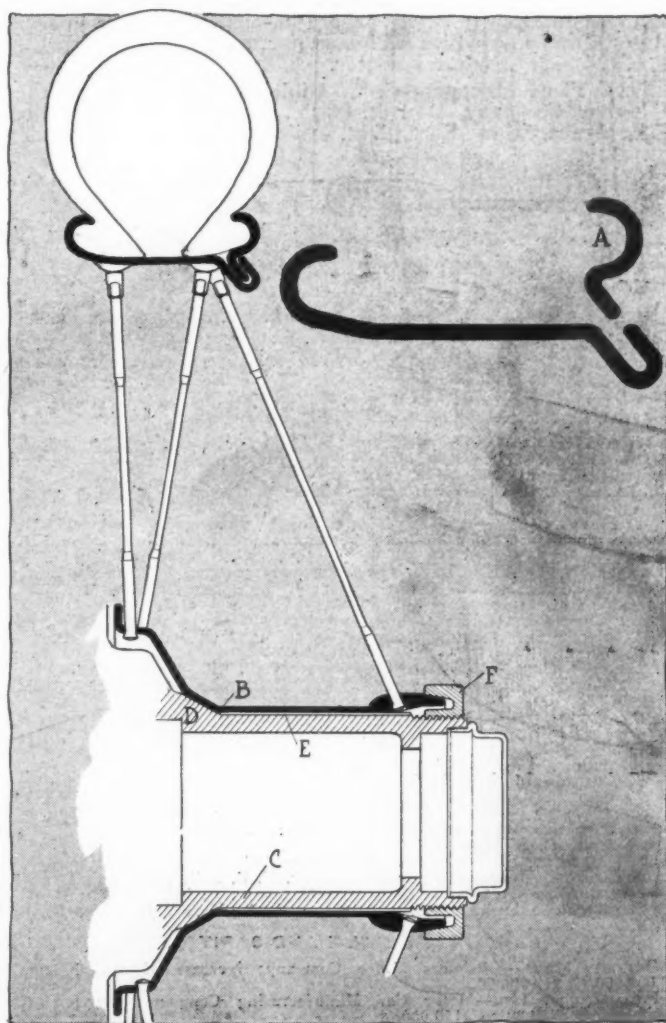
Section through Rudge-Whitworth wheel and Houk rim
